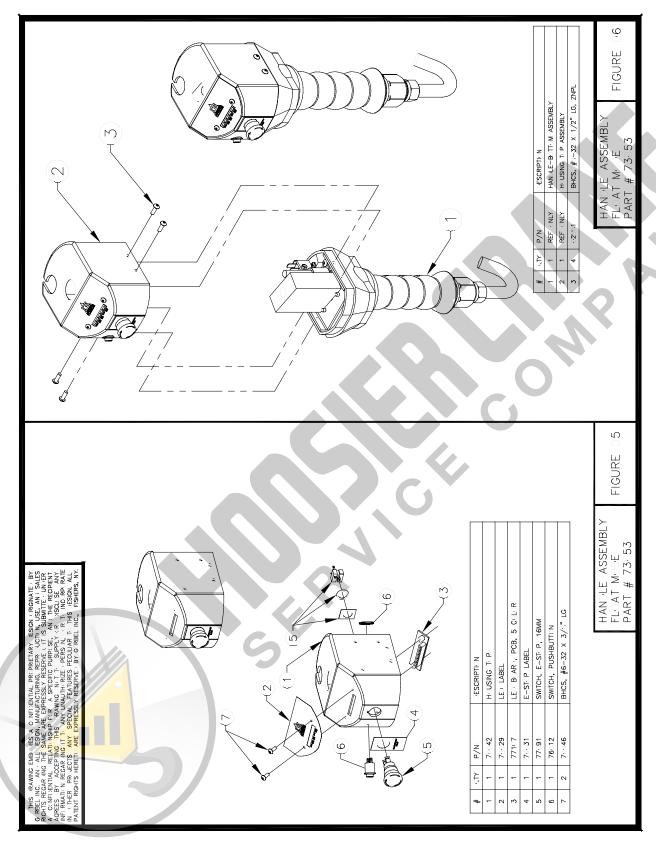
(bottom) & Figure D6 (top). Float Mode Handle Assembly.
